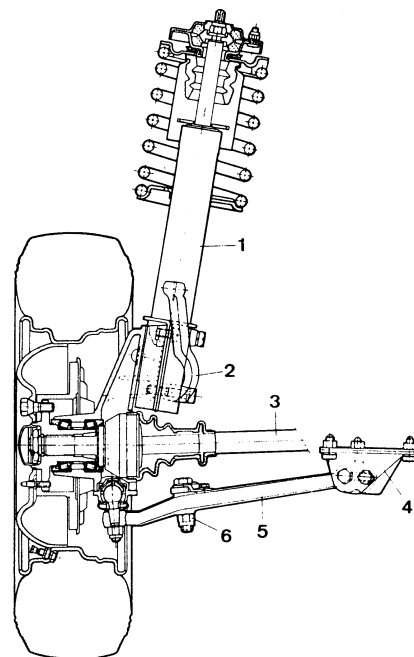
Front strut suspension: 1 Strut - 2 Steering lever - 3 Half shaft with double universal joint - 4 Control arm support - 5 Control arm - 6 Fastening bolt for the leading arm.
